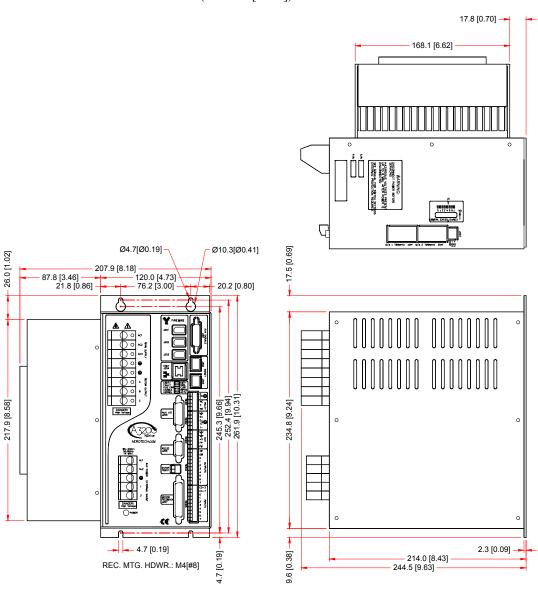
Ndrive HP 50/75/100 Dimensions
